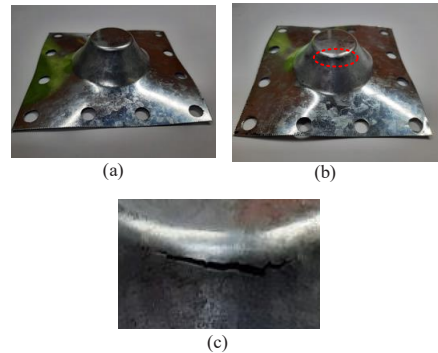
Examples of specimens during the screening phase; (a) successful part (b) failure part (c) zoom-in the location of the fracture.
